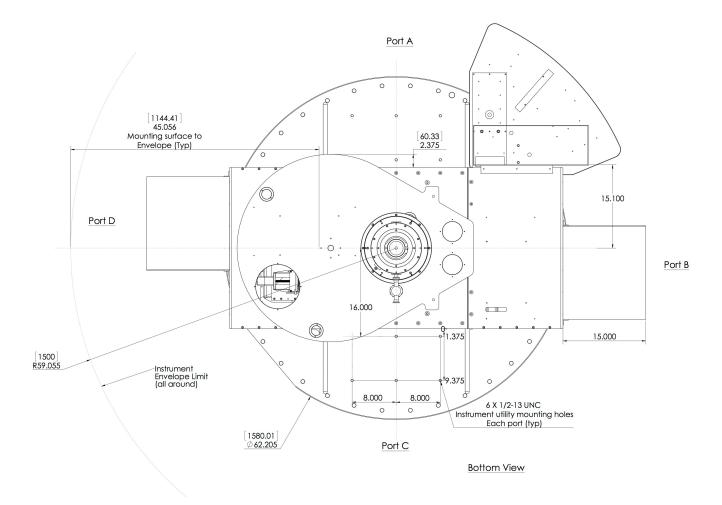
Bottom view of the instrument cube showing the LMI filter wheel, GWAVES electronics boxes, cube interface plate, and auxiliary hole patterns on the cube main flange serving each port.
